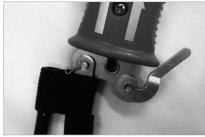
B Lock the release grip with the Allen key and insert the cotter pin.
